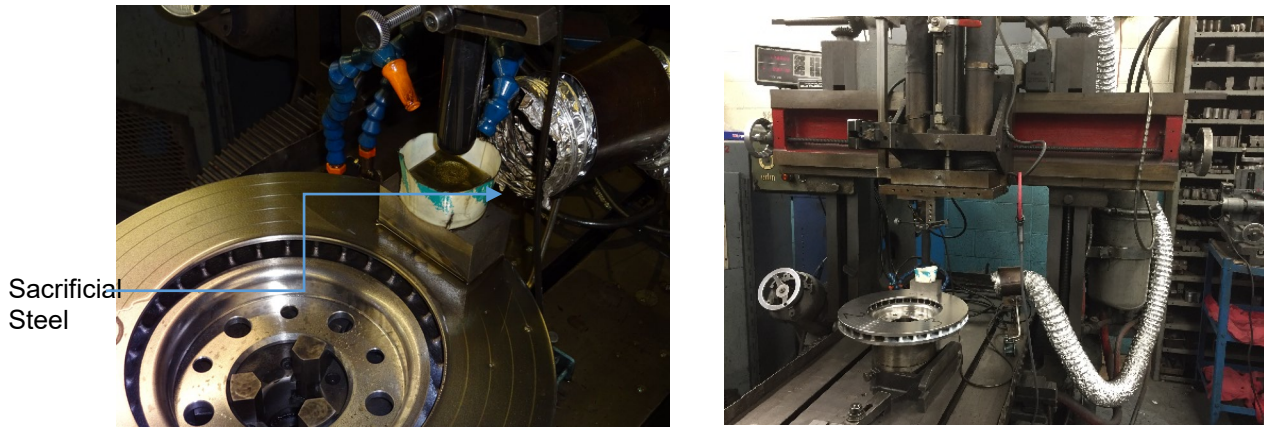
EDM Machine setup and the sacrificial steel machined on rotor plate
